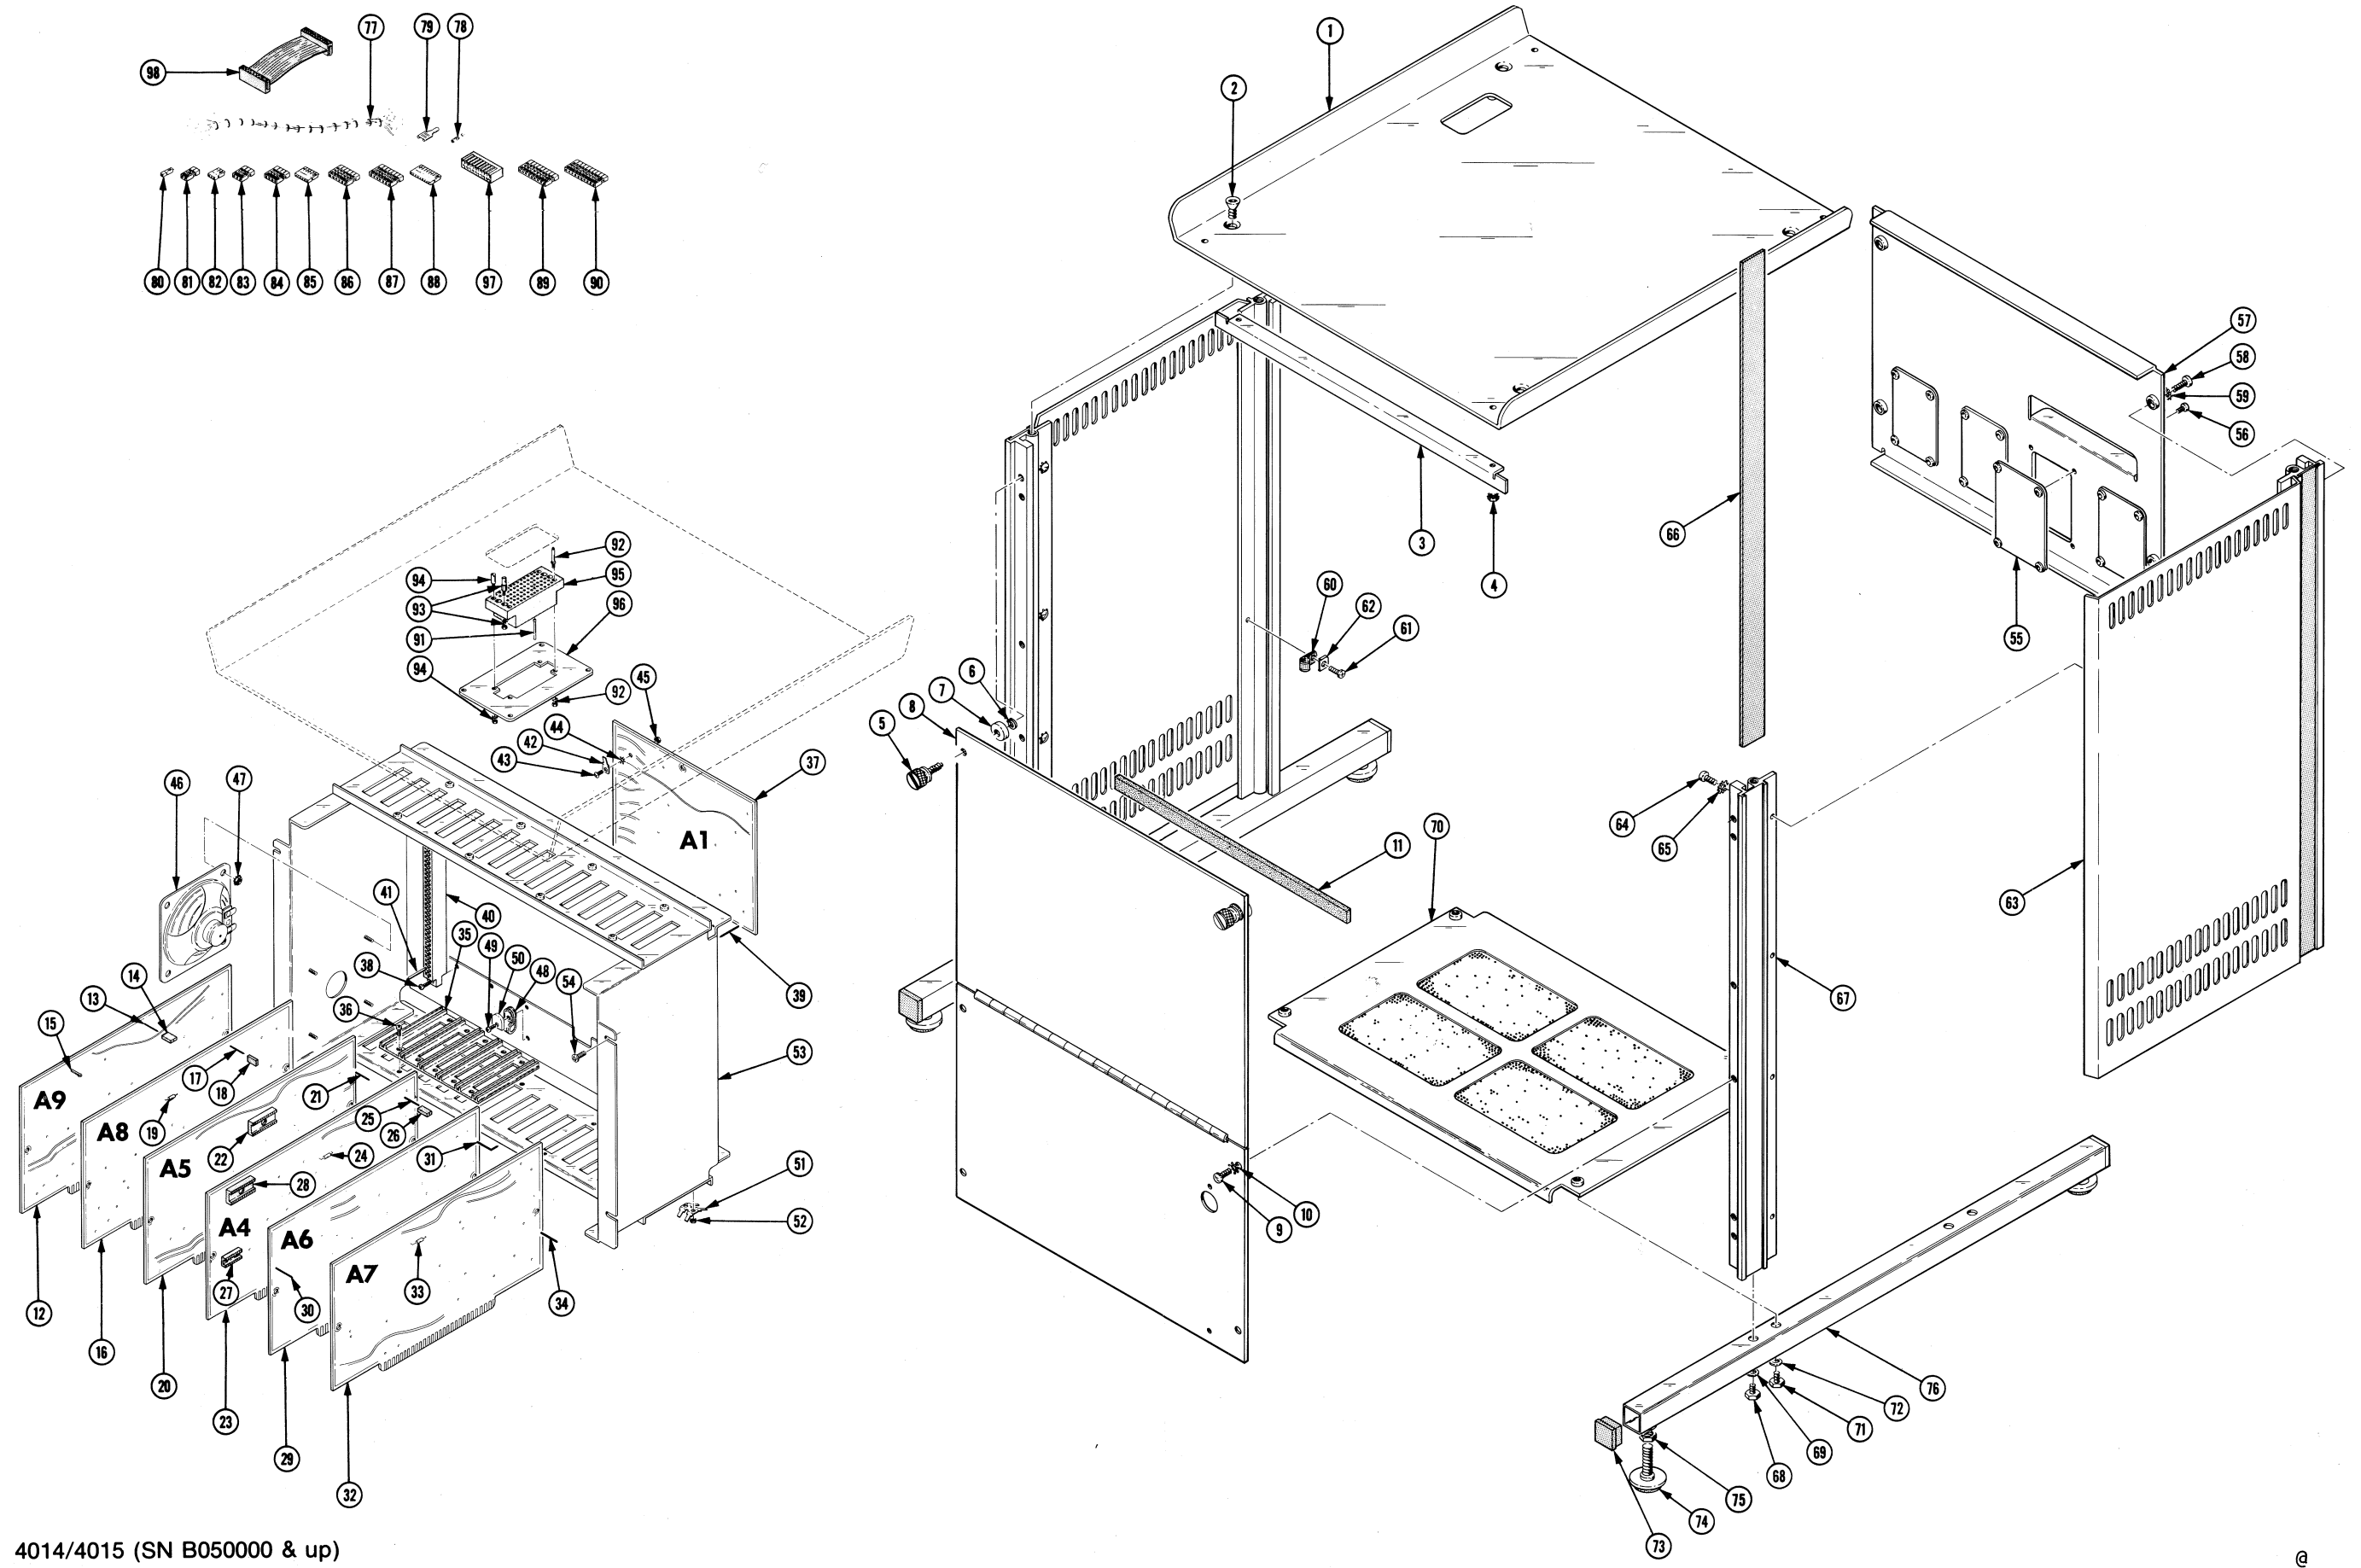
CHASSIS & CIRCUIT BOARD ASSEMBLIES
